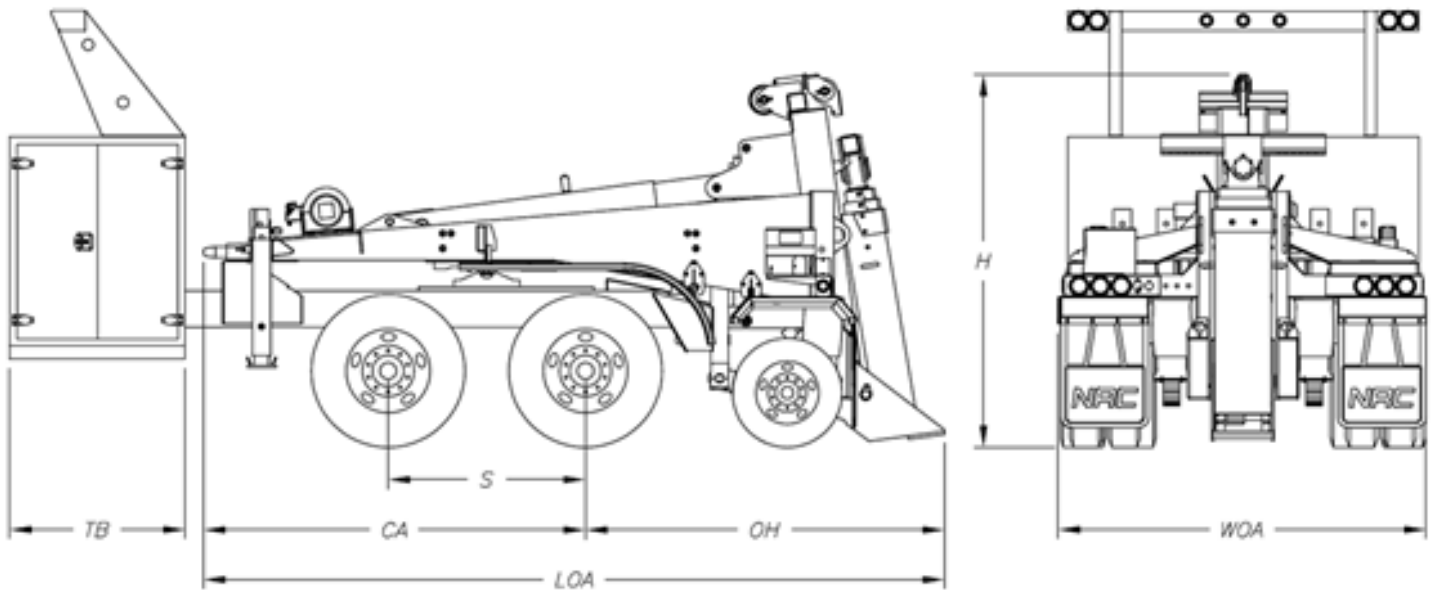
CHASSIS DIMENSIONS - WITH TAG AXLE
